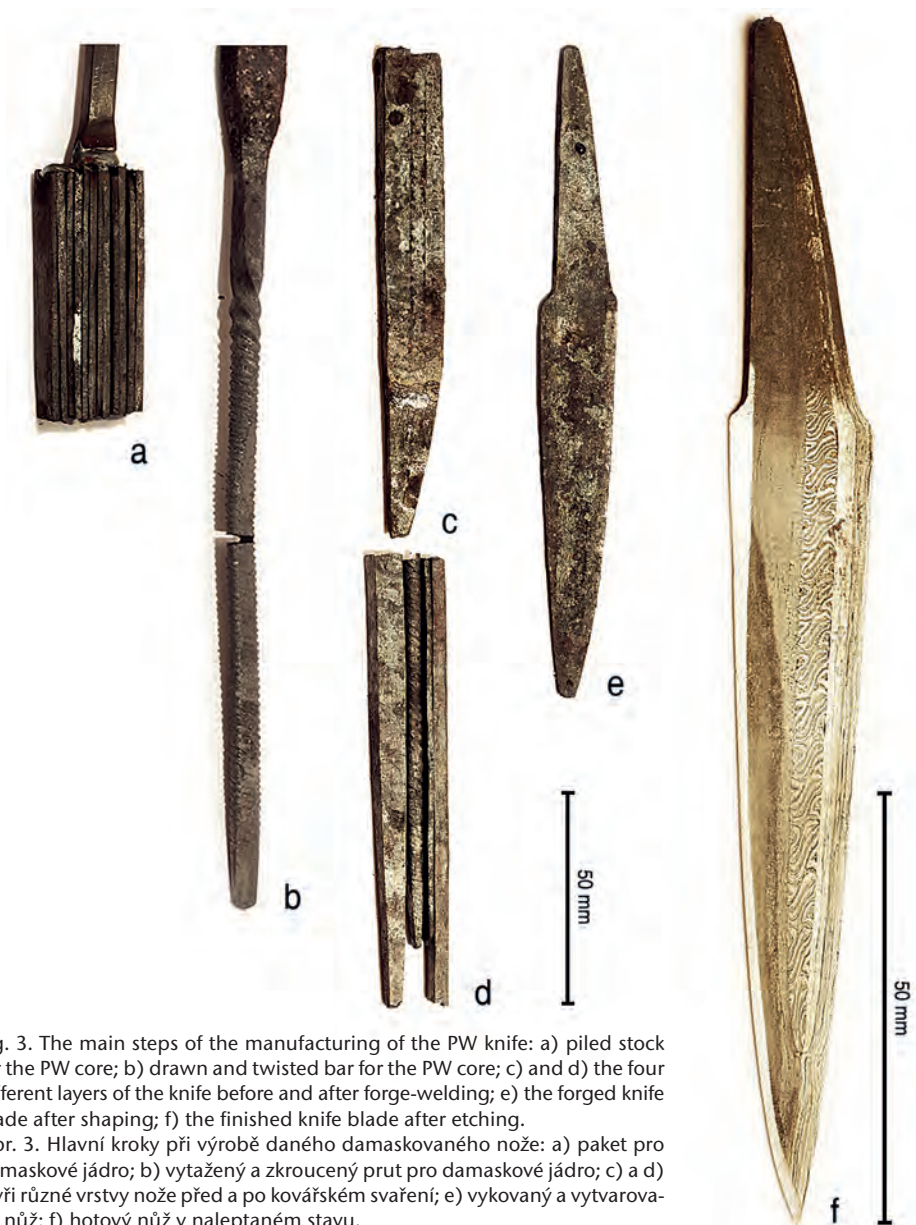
The main steps of the manufacturing of the PW knife: a) piled stock for the PW core; b) drawn and twisted bar for the PW core; c) and d) the four different layers of the knife before and after forge-welding; e) the forged knife blade after shaping; f) the finished knife blade after etching.
